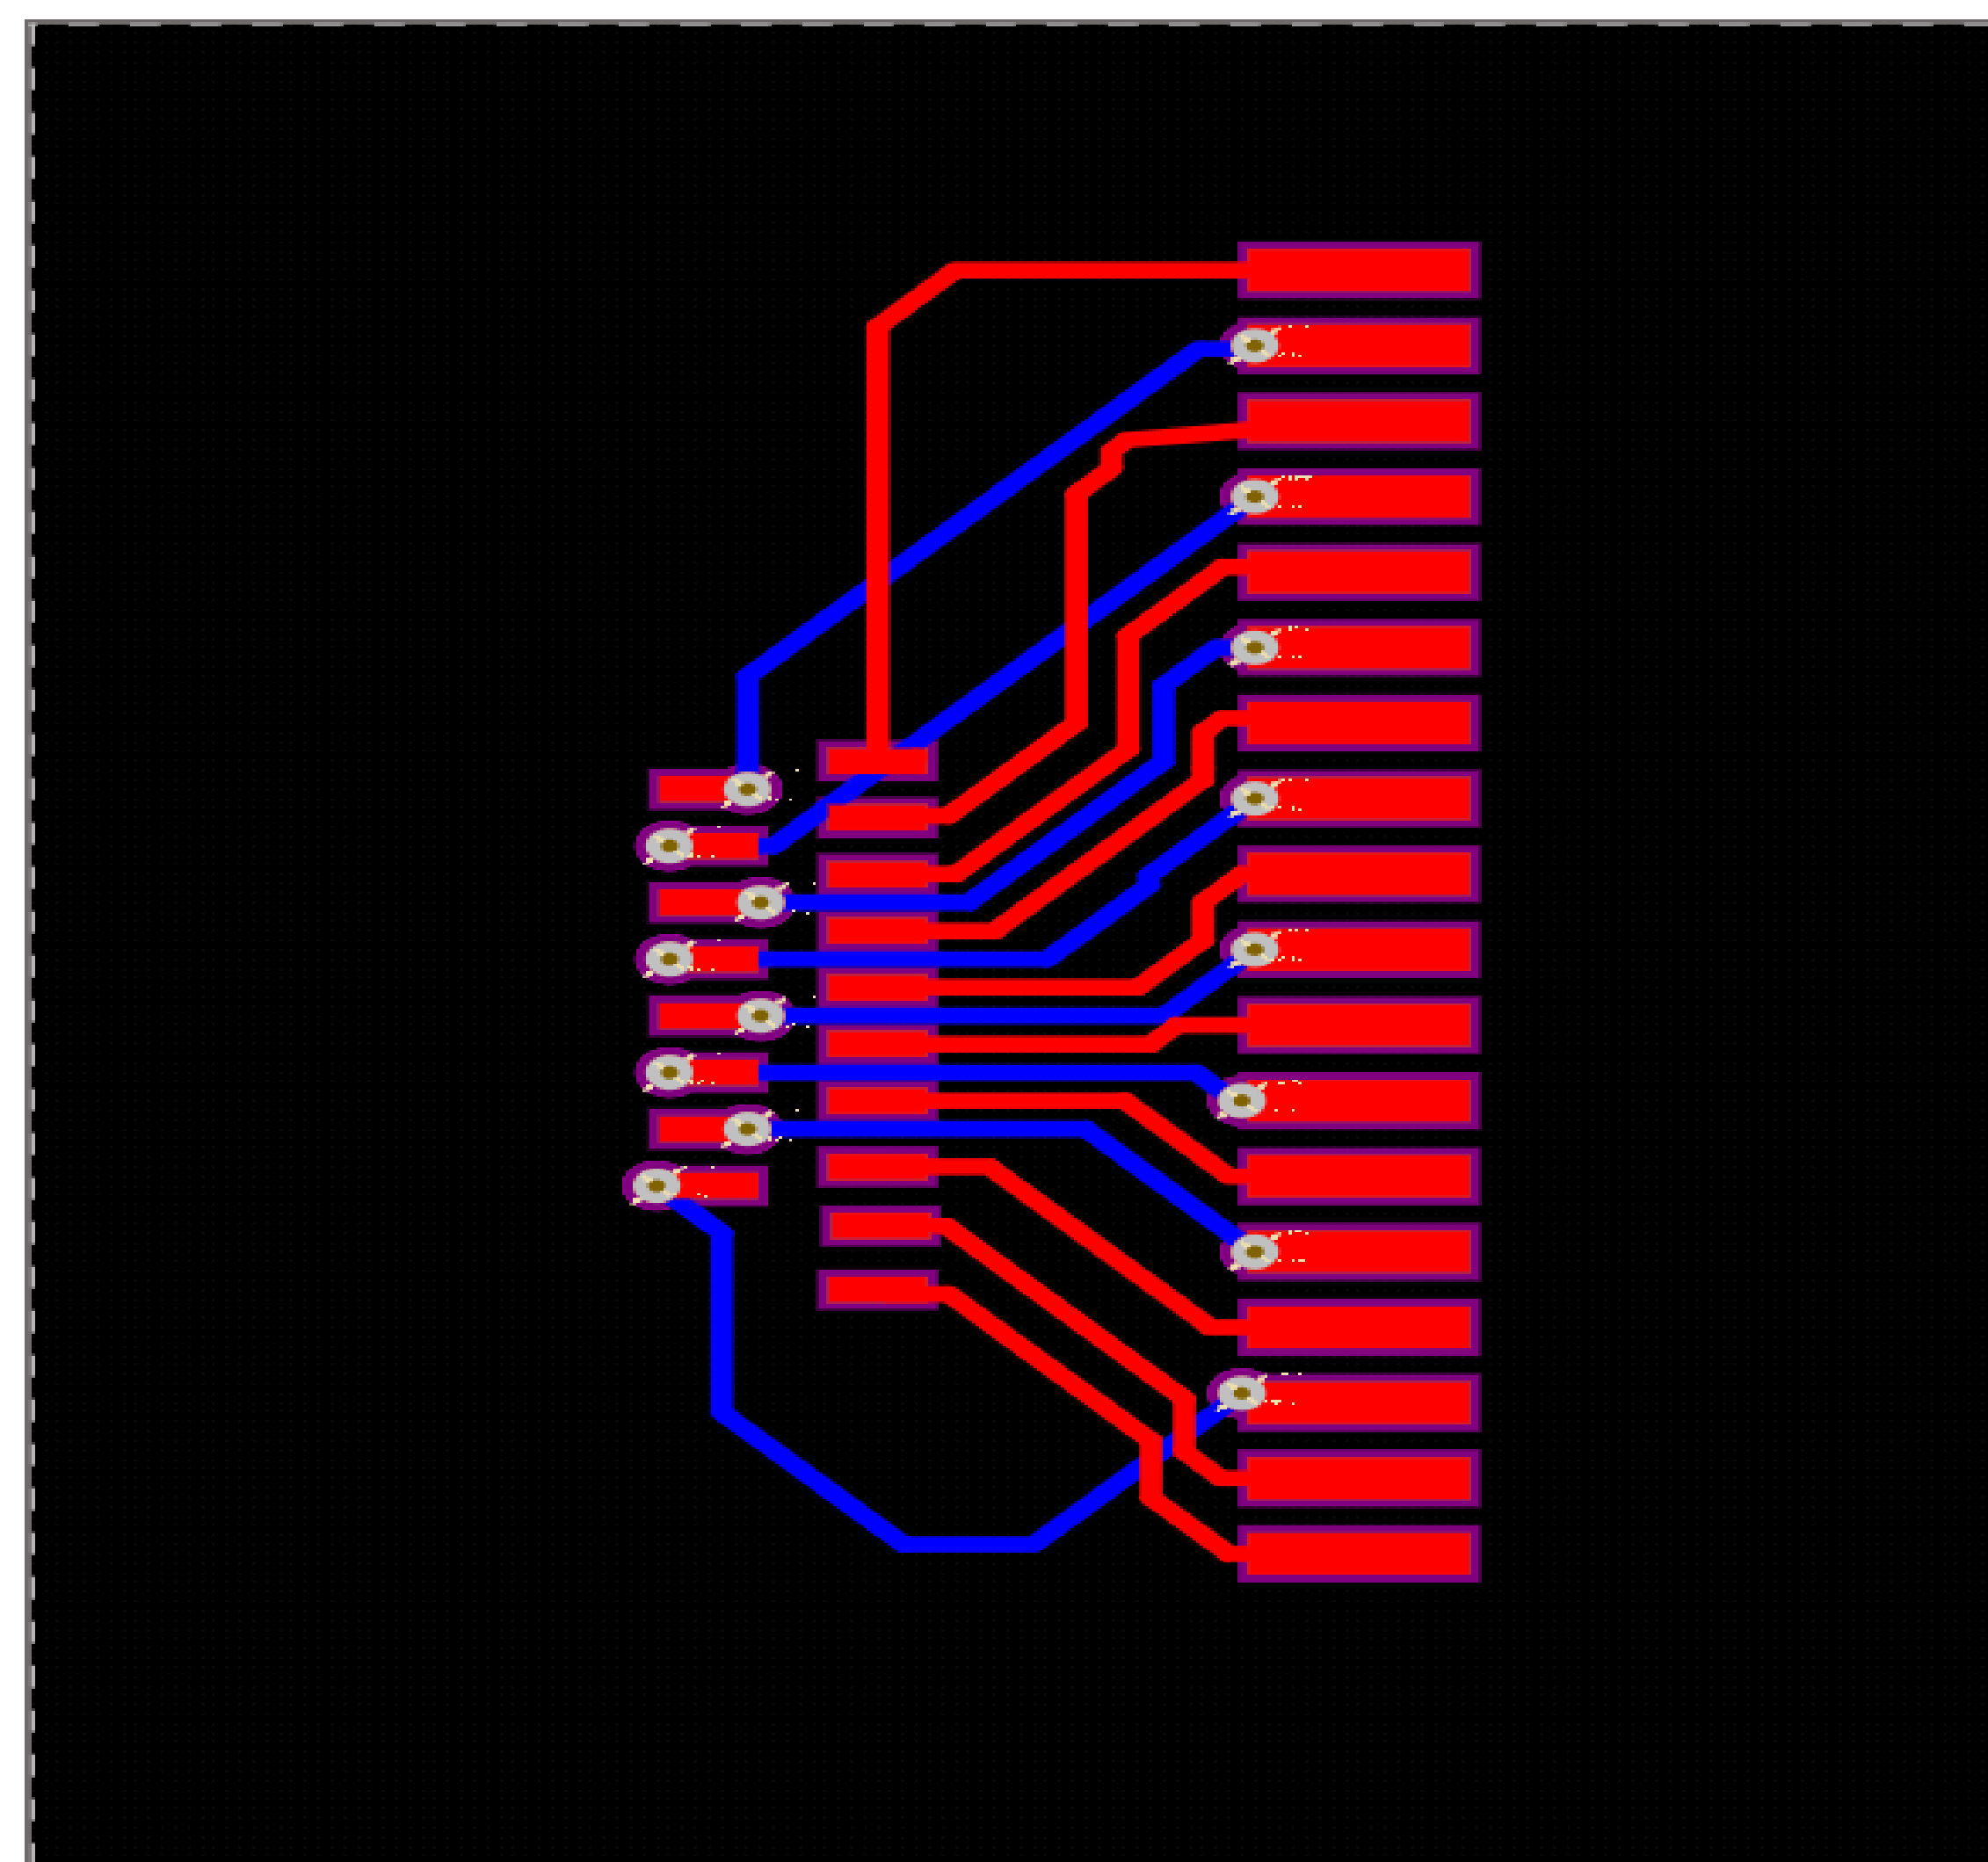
FINAL LAYOUT FOR THE PCB DESIGN ON ALTIUM
